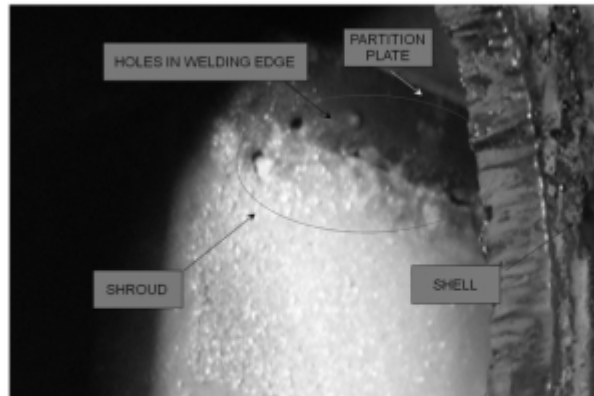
Weld edge between shroud and Partition Plate is having holes from where live-steam was leaking into Drain Cooling zone enclosed with-in shroud.
